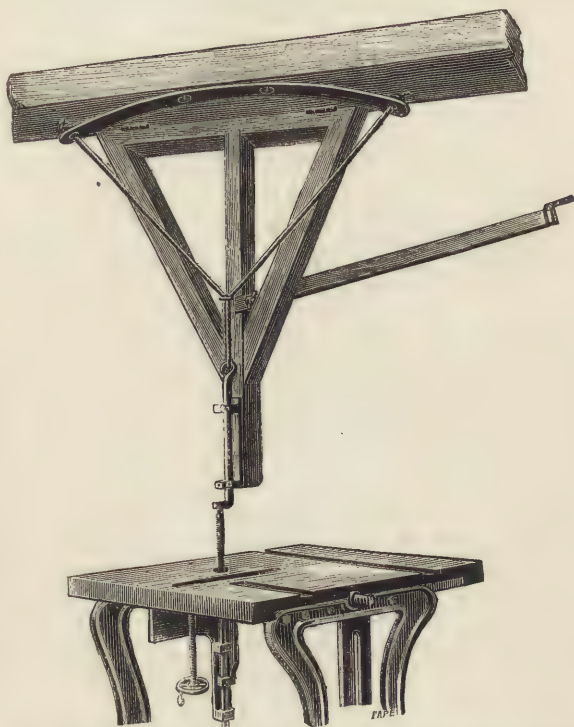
SCROLL SAW ATTACHMENT FOR FOOT POWER MACHINE.
